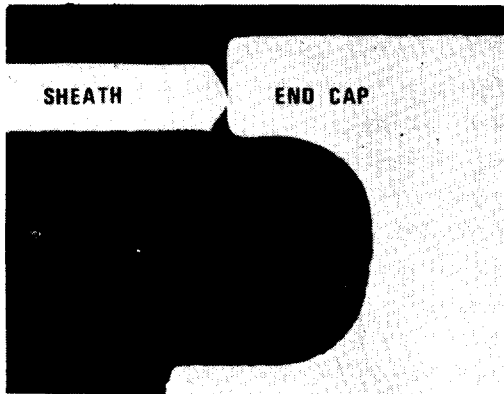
Butt joint design for resistance upset welding in the HWR fuel
